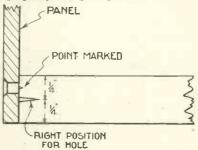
Marking and piercing the edge of the base for the panel holding screws. When fully assembled, the panel projects \(\frac{1}{2}\) in. below the base
